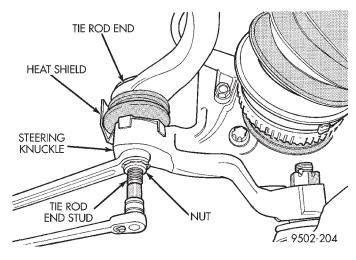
Tie Rod End Attaching Nut loosening and removing nut with wrench (Fig. 18).
